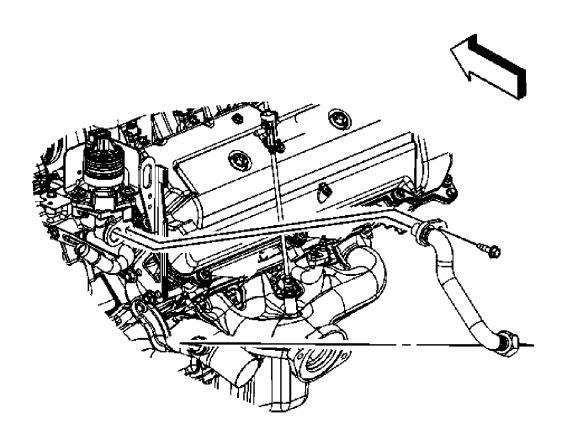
Identifying EGR Valve Inlet Pipe Courtesy of GENERAL MOTORS CORP.
